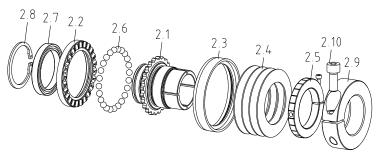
Example - Assembly of SYNTEX®-NC (hub design 6.1)
